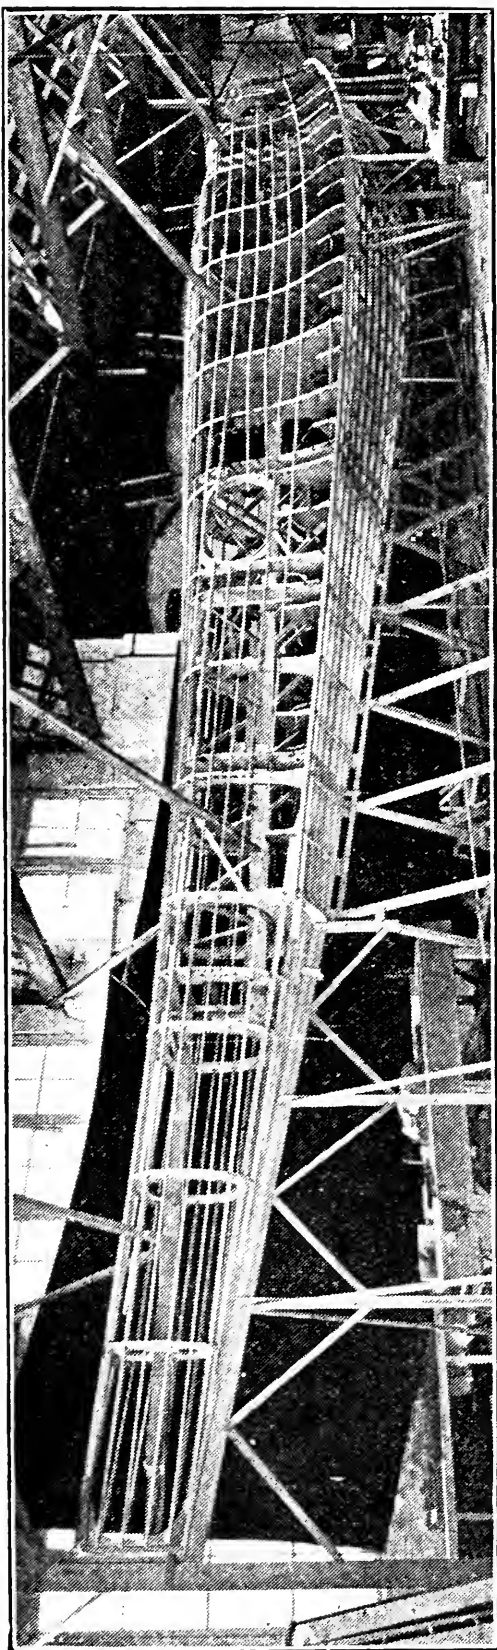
N4 Atlanta. Skeleton view showing longitudinal system.
